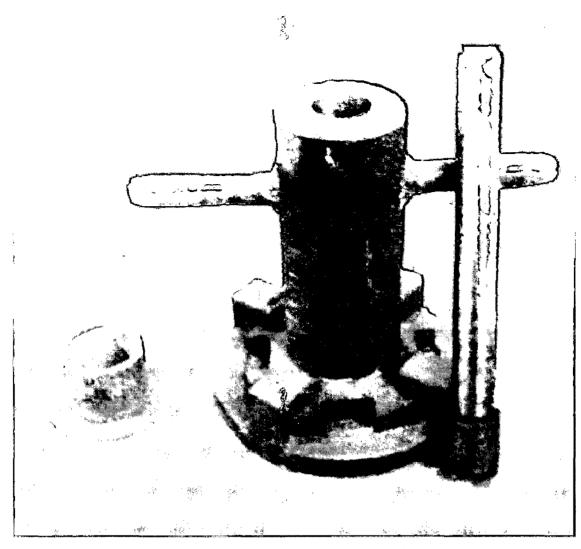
Experimental Setup used with Compression Testing Machine (Cylinder, piston, stand and extrusion assembly)
